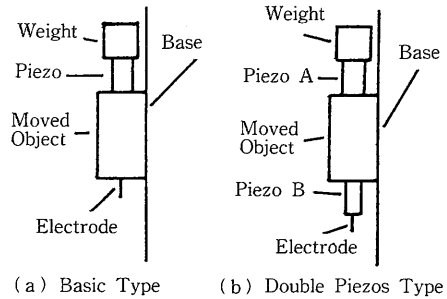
Electro-Discharge Machine Using Impact Drive Mechanism
